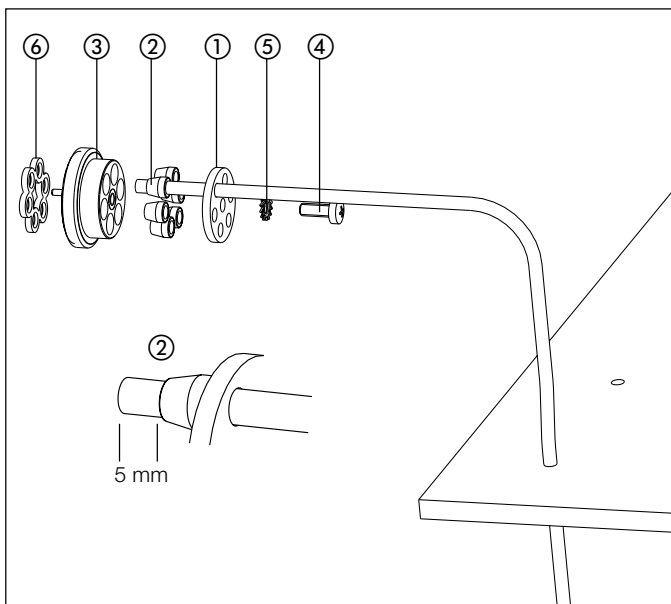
Assembly of the hoses to the „six-fold hose coupling“
